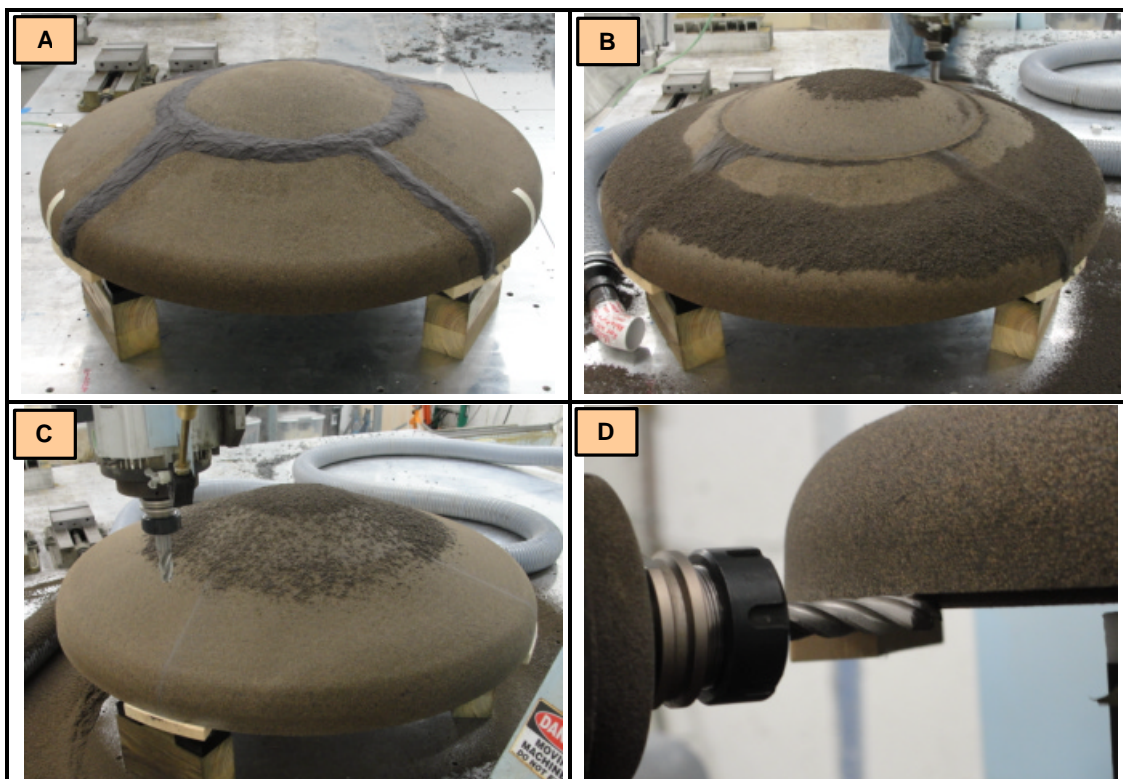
5-Axis CNC Milling Steps to Remove Excess Gap Filler, Overpack, and Edge Extension
